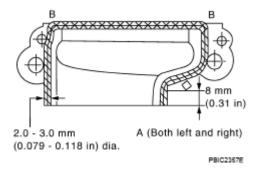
Identifying Mating Surface Of Camshaft Bracket (Left Bank Intake)
